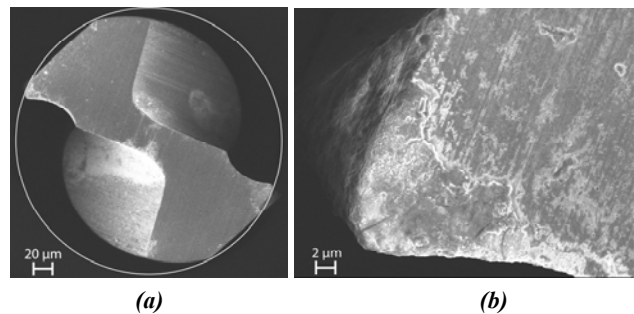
(a) Cutting diameter of uncoated tool after 1 m milling, and (b) cutting edge of uncoated tool after 1 m milling.
